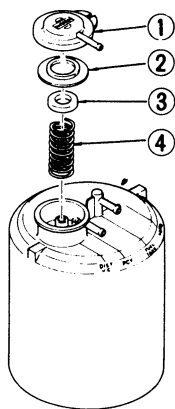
Checking Carbon Canister Purge Control Valve
